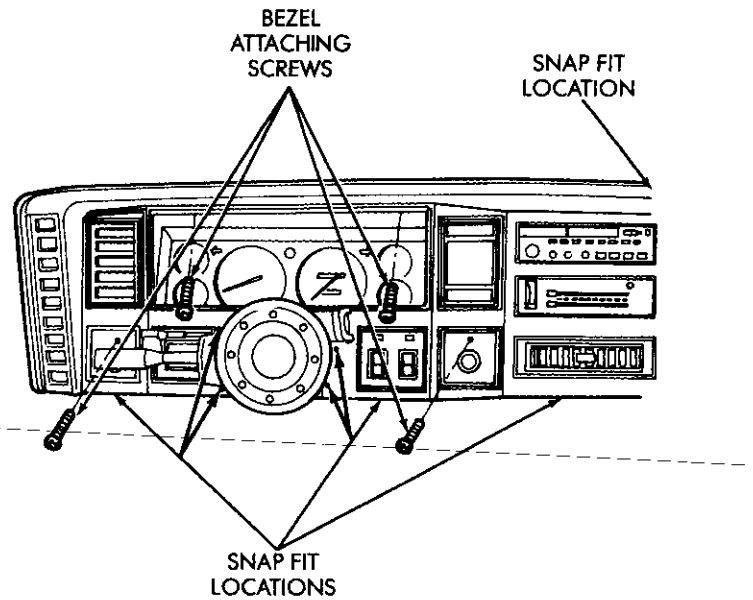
Instrument Bezel Removal/Installation — XJ and MJ
